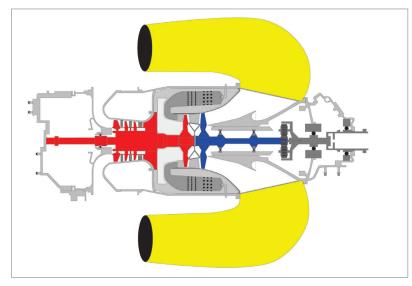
A single spool turboshaft engine incorporating a free power turbine.
